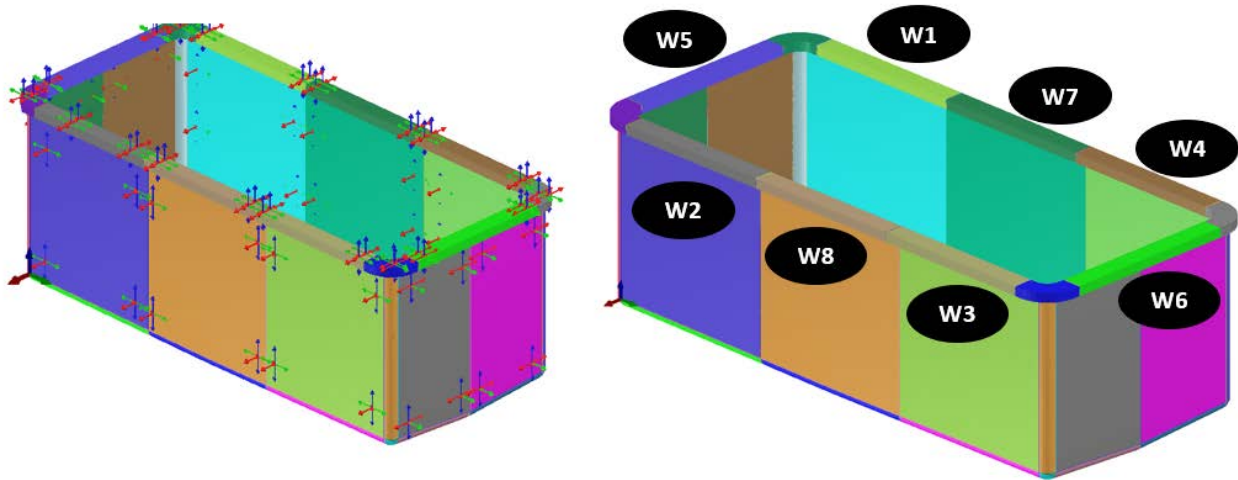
Clamping and weld sequence for main shell to flange welding
